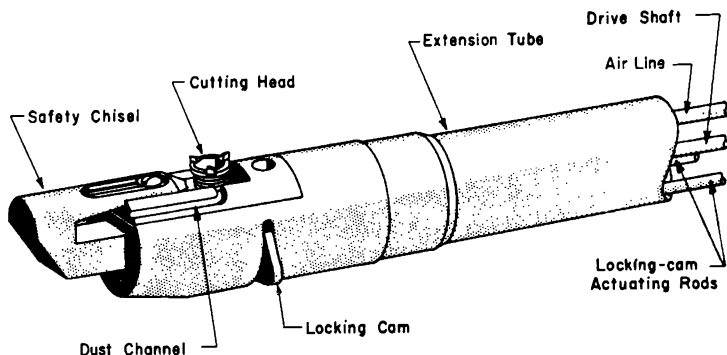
Graphite core borer.²² Rotation of the driveshaft causes the threaded saw to be rotated out from the housing. Each rotation of the saw extends the cutters 0.04 in.
